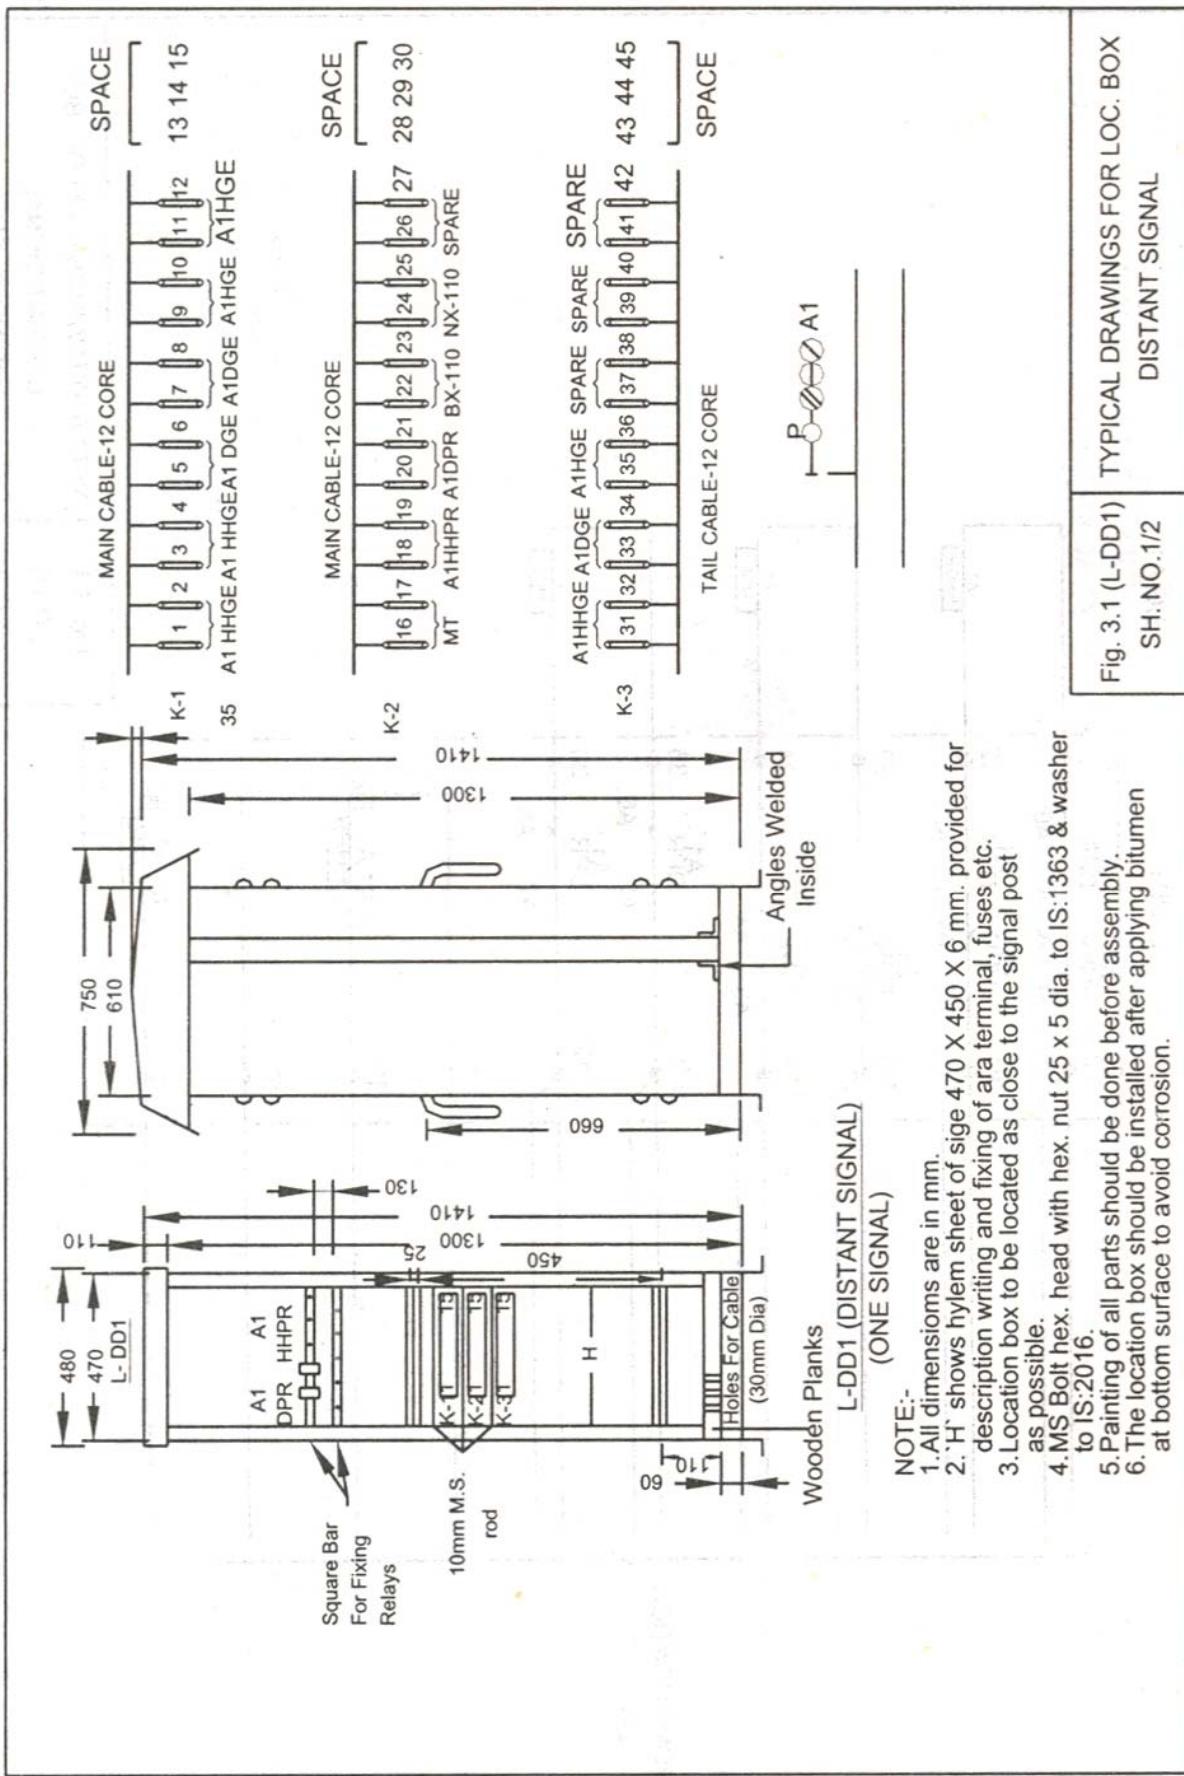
(L-DD1) TYPICAL DRAWINGS FOR LOC. BOX
